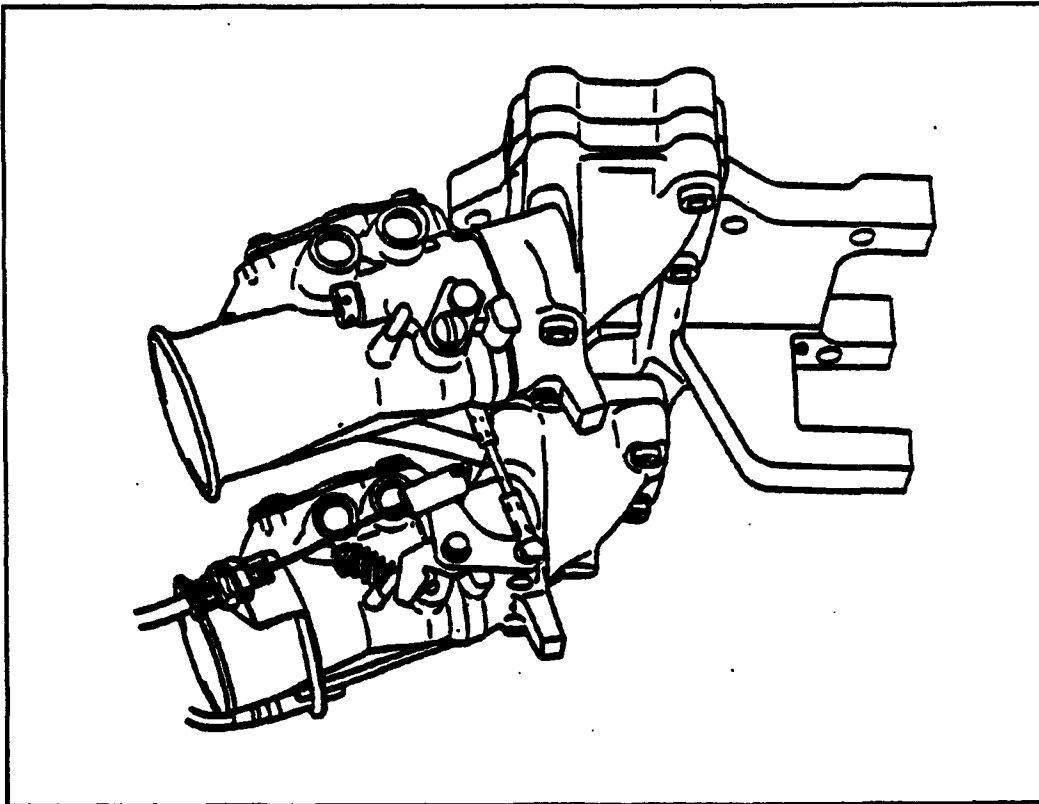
Carburetors (U.S.N. TM Pub No 02E-10, 1990, p. 3-23)
